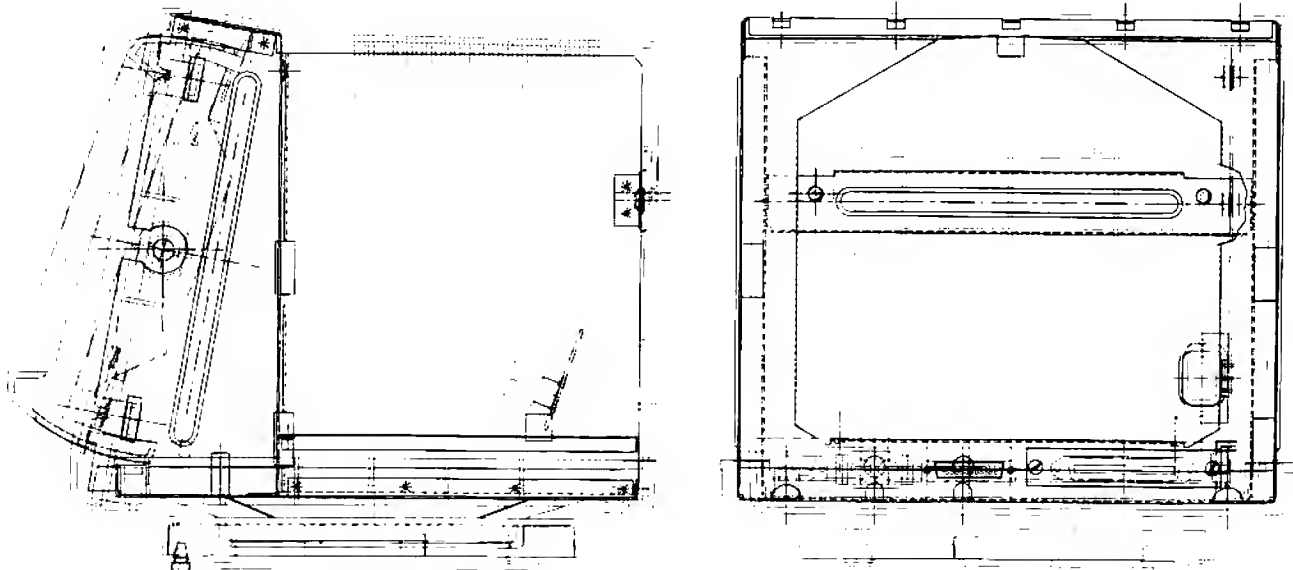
An HP Draft drawing of the HP 2392A CRT tilt mechanism.
